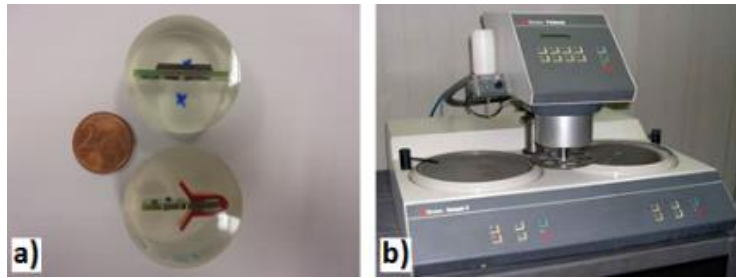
a) Mounted samples from university and b) Mecapol 260, used at University of Minho in (Inventor drawing).
